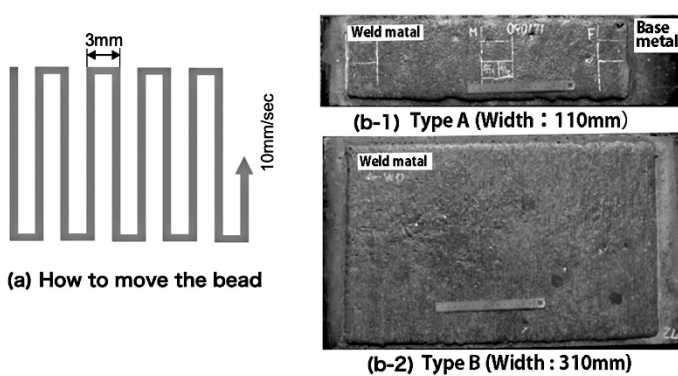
Schematic diagram of move the bead and welding materials
